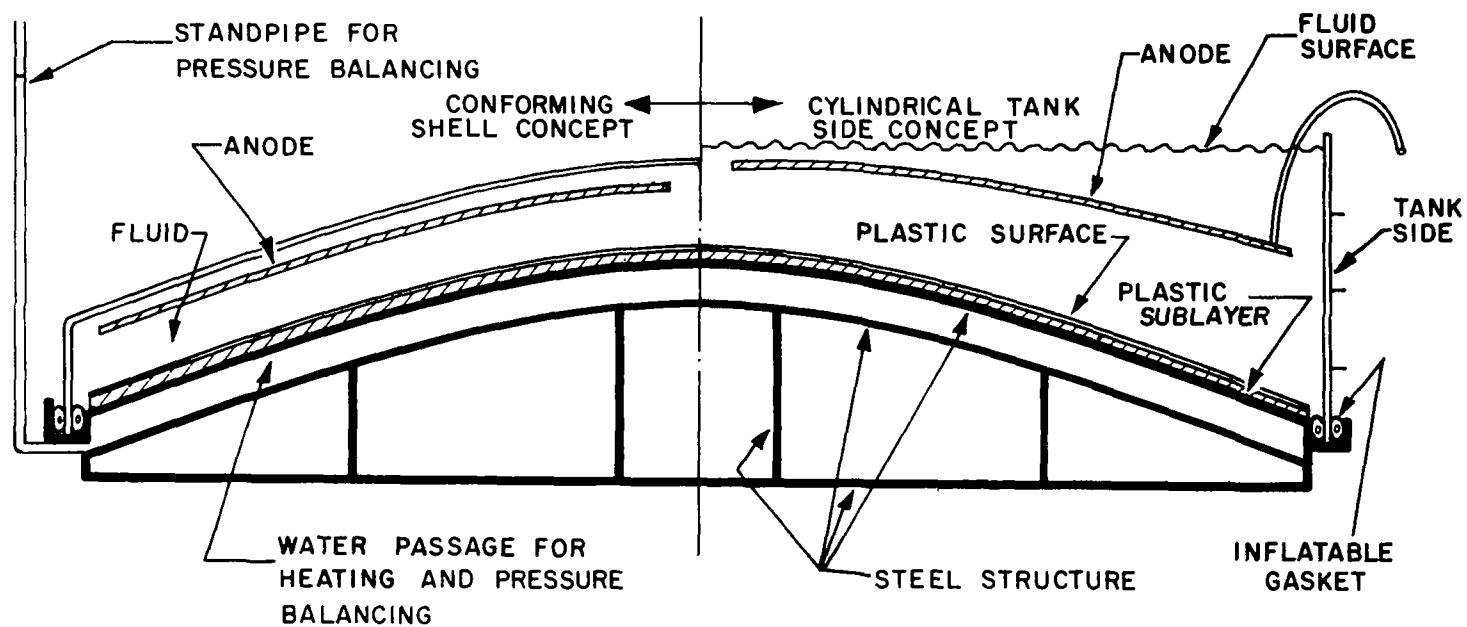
SCHEMATIC DIAGRAM OF MASTER STRUCTURE AND TANK CONSTRUCTION
